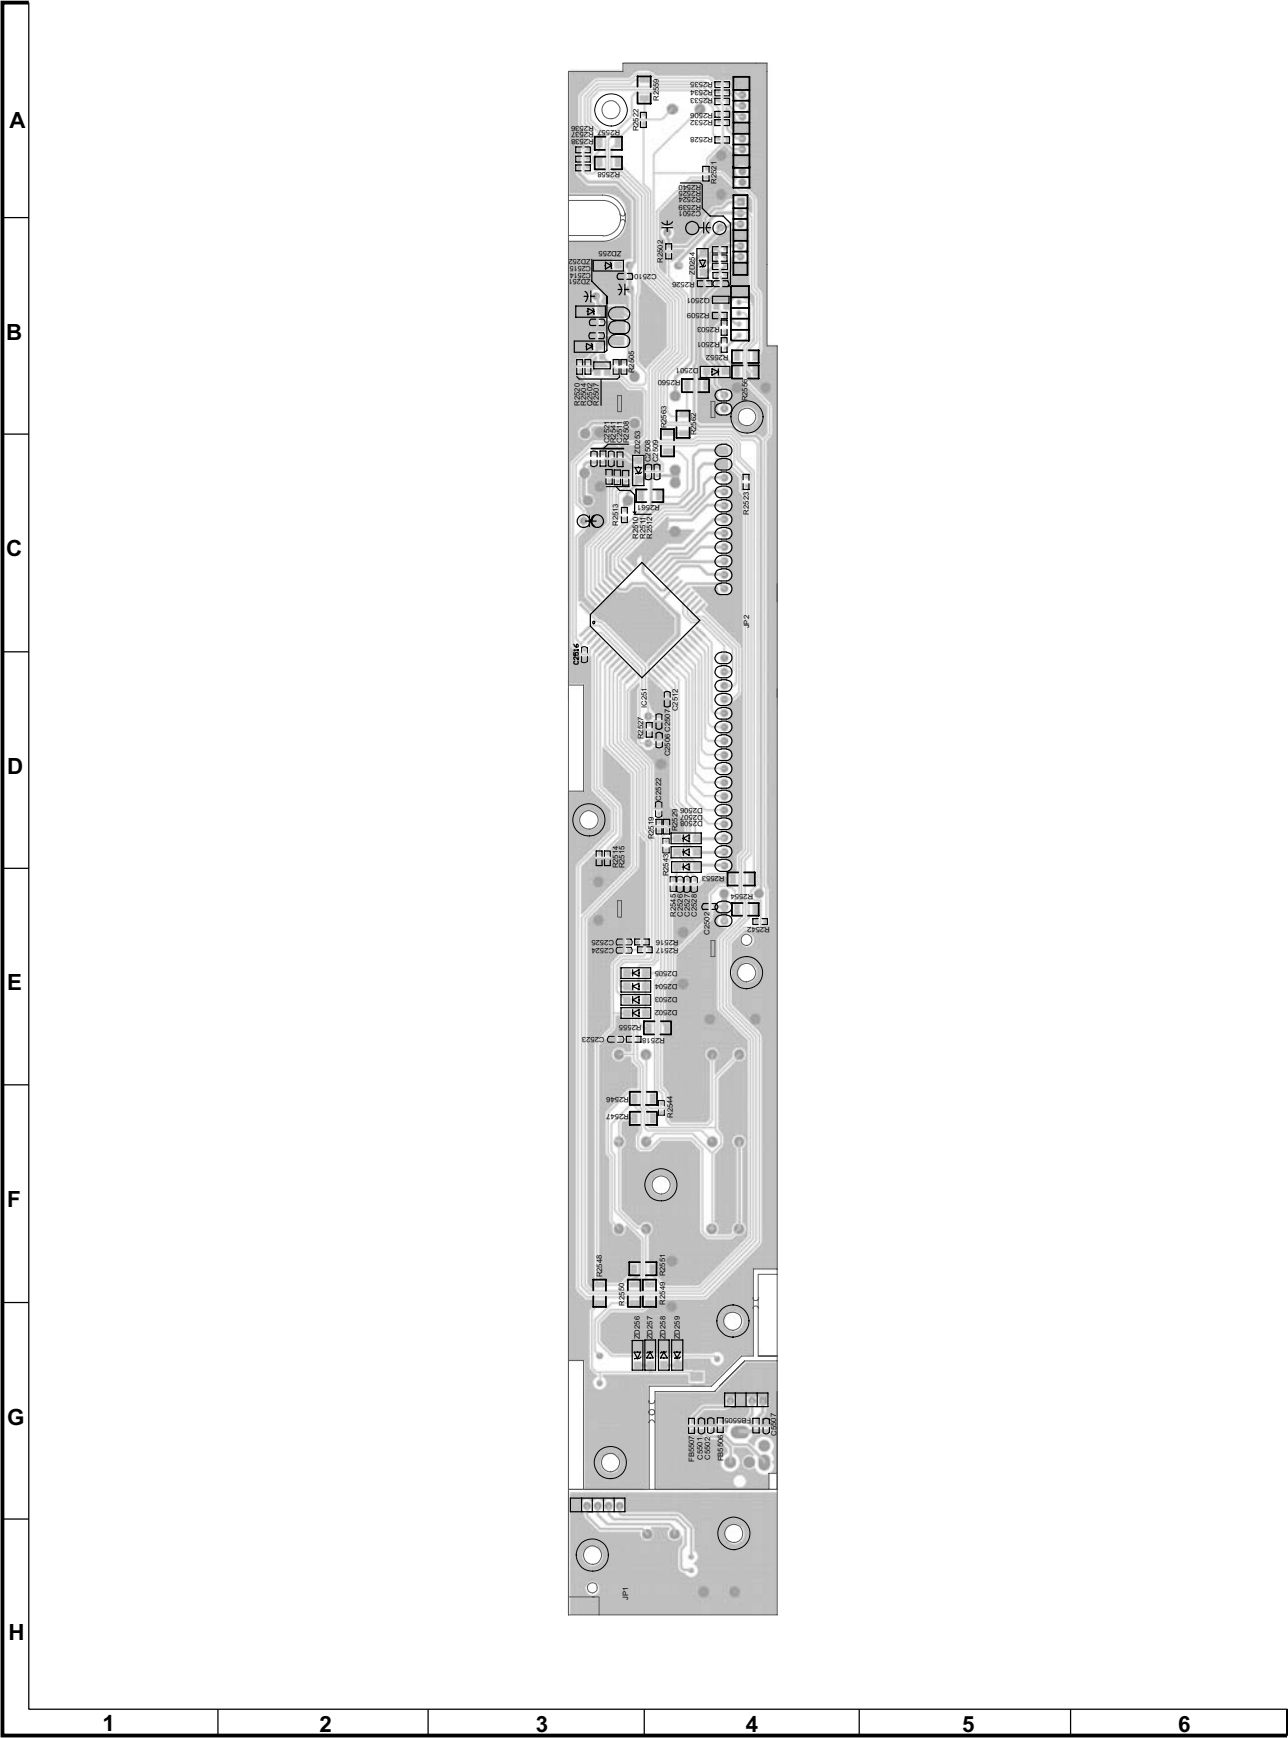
WIRING SIDE OF CONTROL PCB (BOTTOM VIEW) (2/2)
